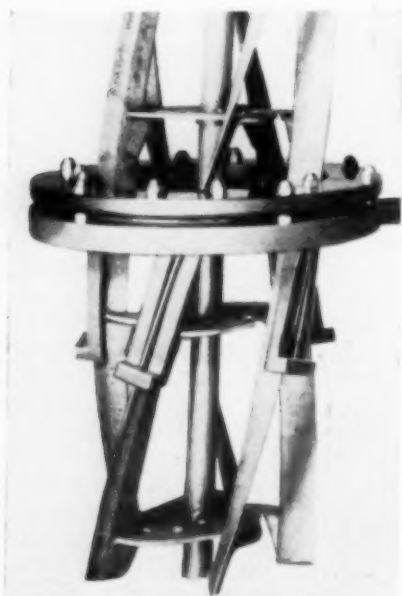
Heating Coil and Quenching Fixture for Simultaneous Hardening of Cutter Blades on a Lawn Mower Reel
